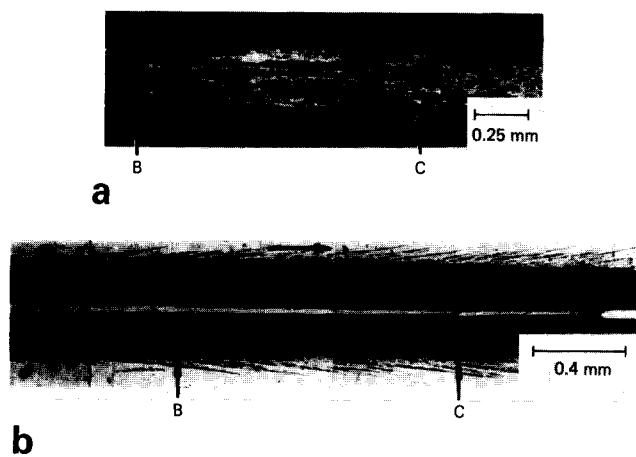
Fracture surface and corresponding side view at specimen fracture. Arrow B indicates the last striation and arrow C the critical crack length
